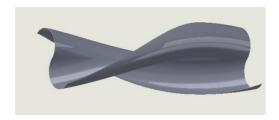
Drawing of Savonius blade using SOLIDWORKS 2022
